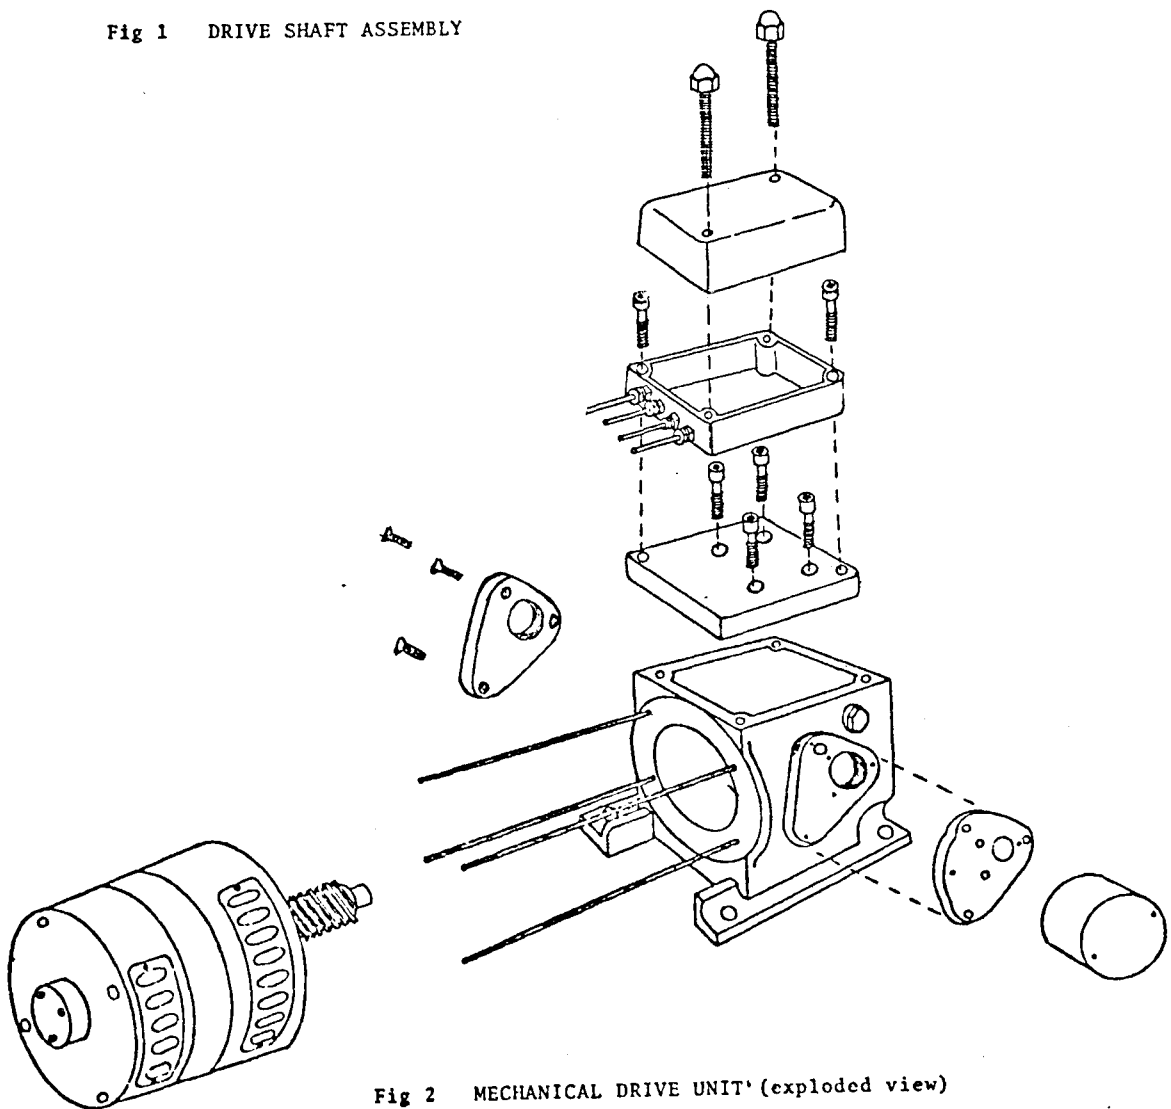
MECHANICAL DRIVE UNIT' (exploded view)
